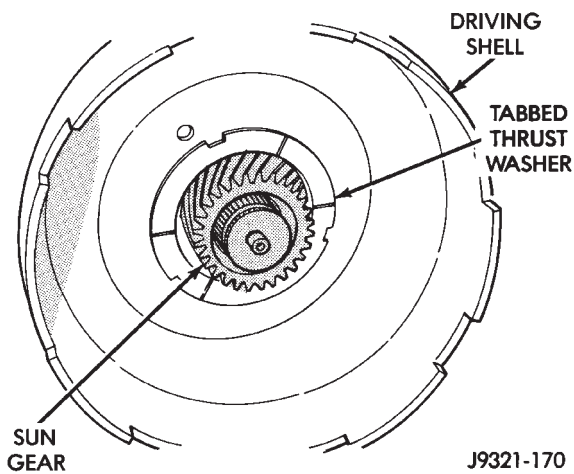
Driving Shell Thrust Washer Removal (46RH)
